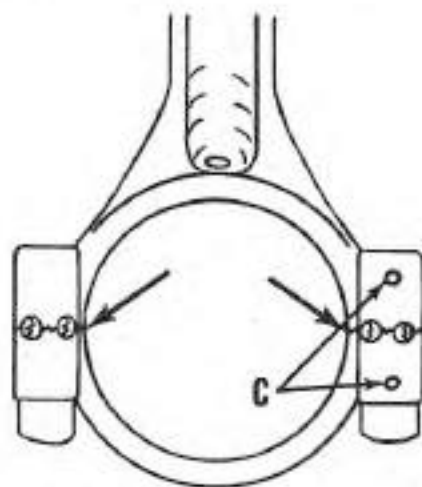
Uneven fractured parting line of rod and cap (shown by arrows) assures positive fit after assembly. Be sure correlation marks (C) are aligned.
